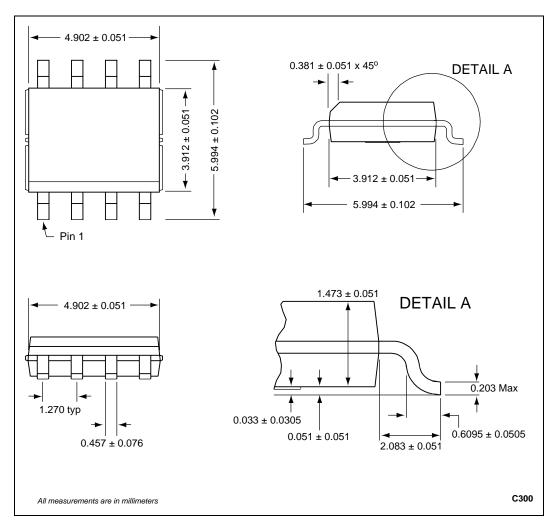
CX65002 8-Pin SOIC Package Dimension Drawing
